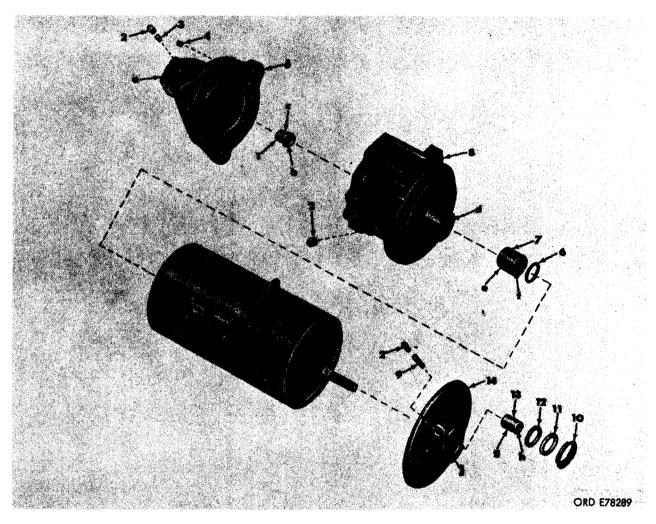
Pinion housing, intermediate housing, and commutator end head assemblies—exploded view.
